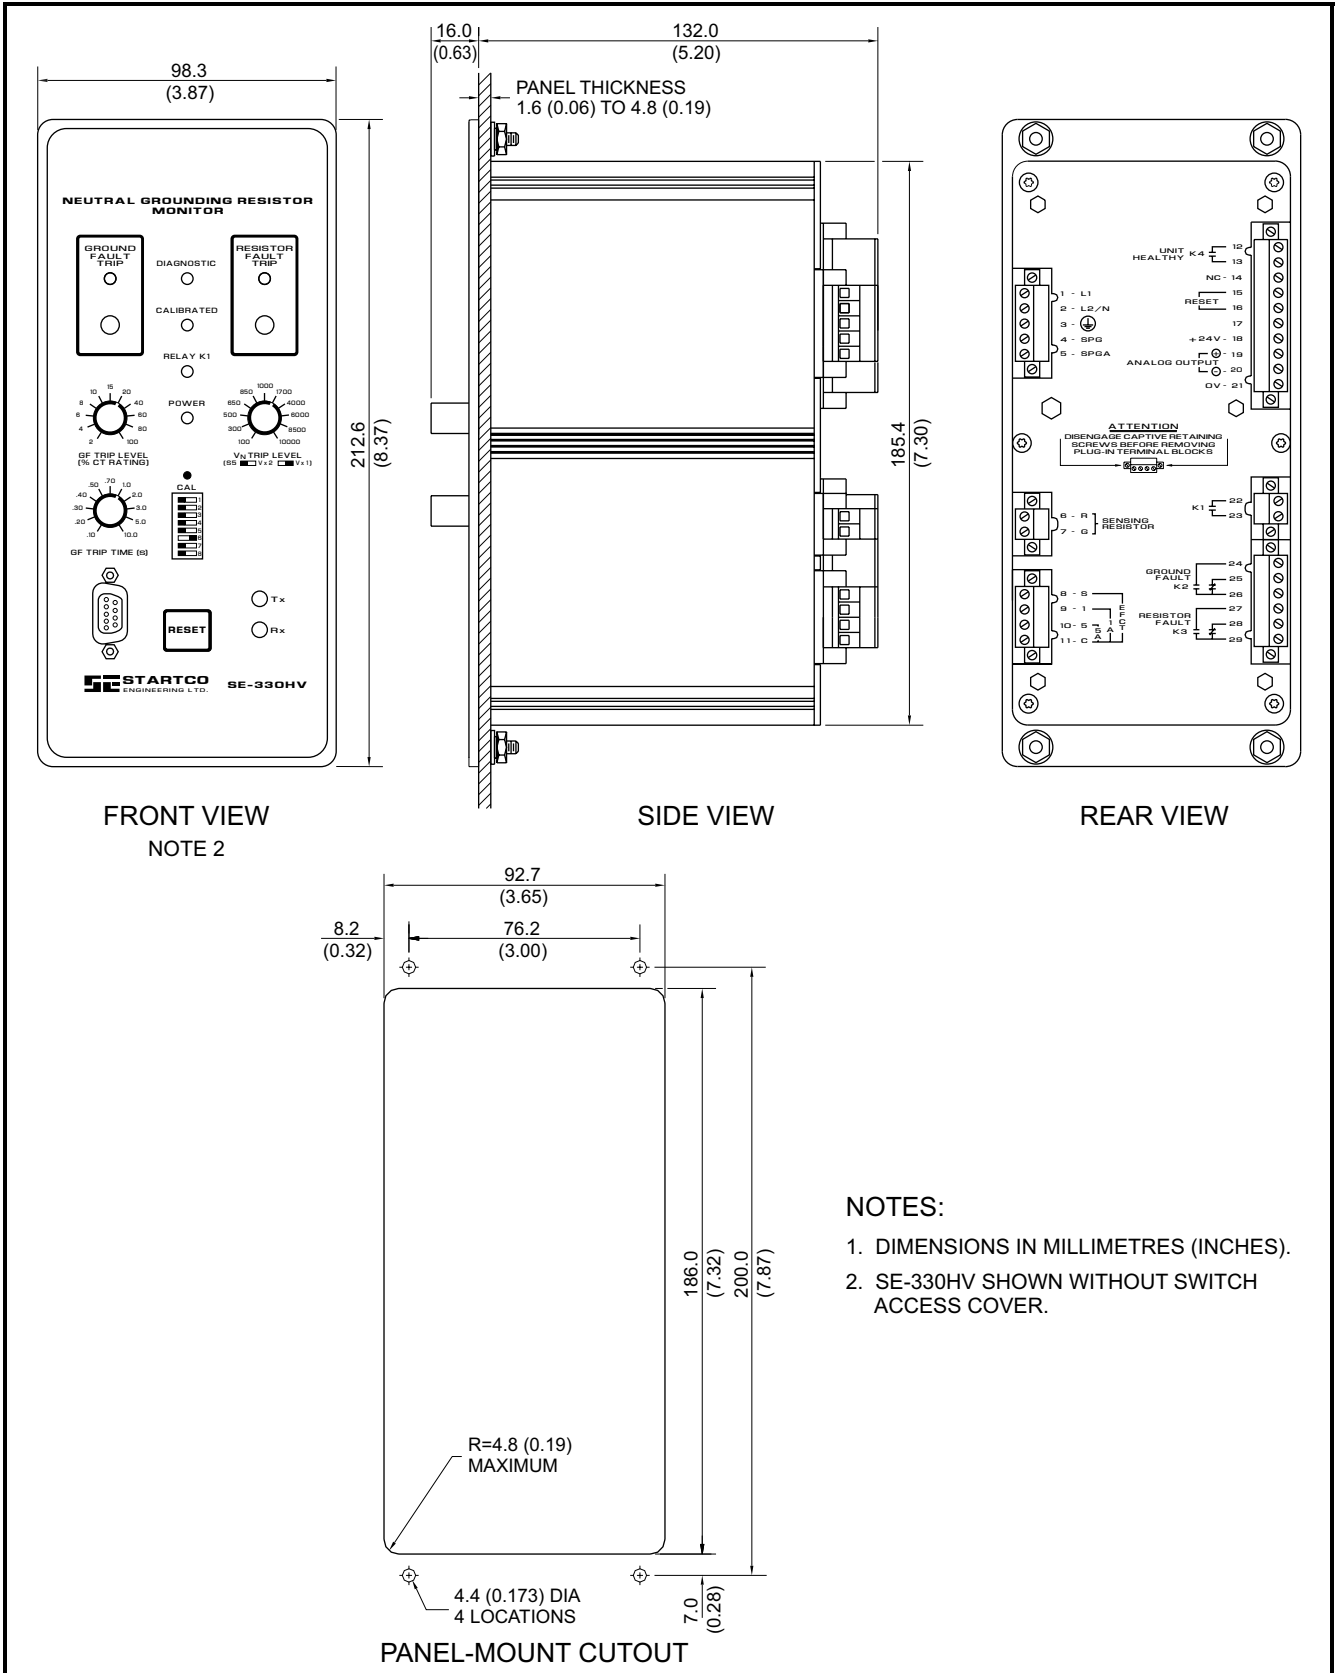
SE-330HV Outline and Panel-Mounting Details.
